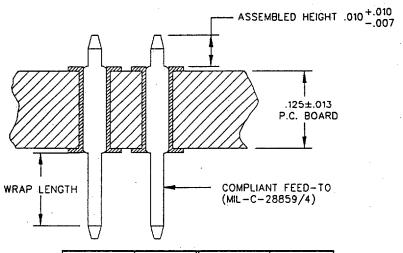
<u>Cross-sectional view of printed-wiring electrical backplane assembly</u> - Continued.
